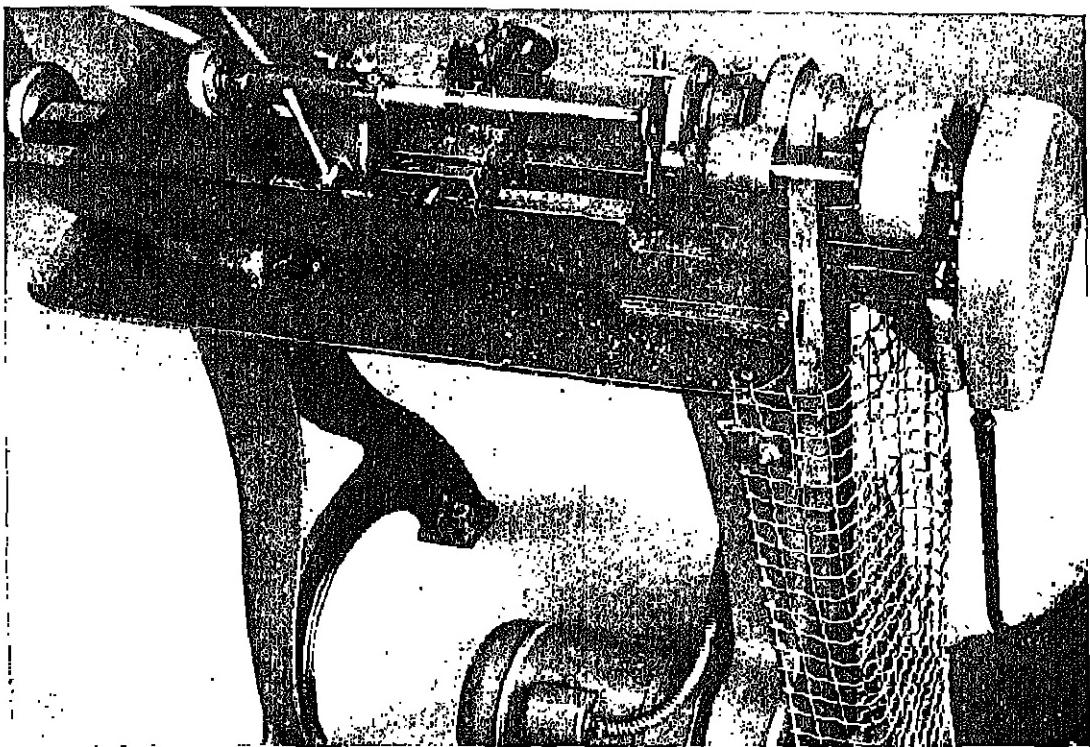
SELF-CONTAINED SCREW CUTTING LATHE
